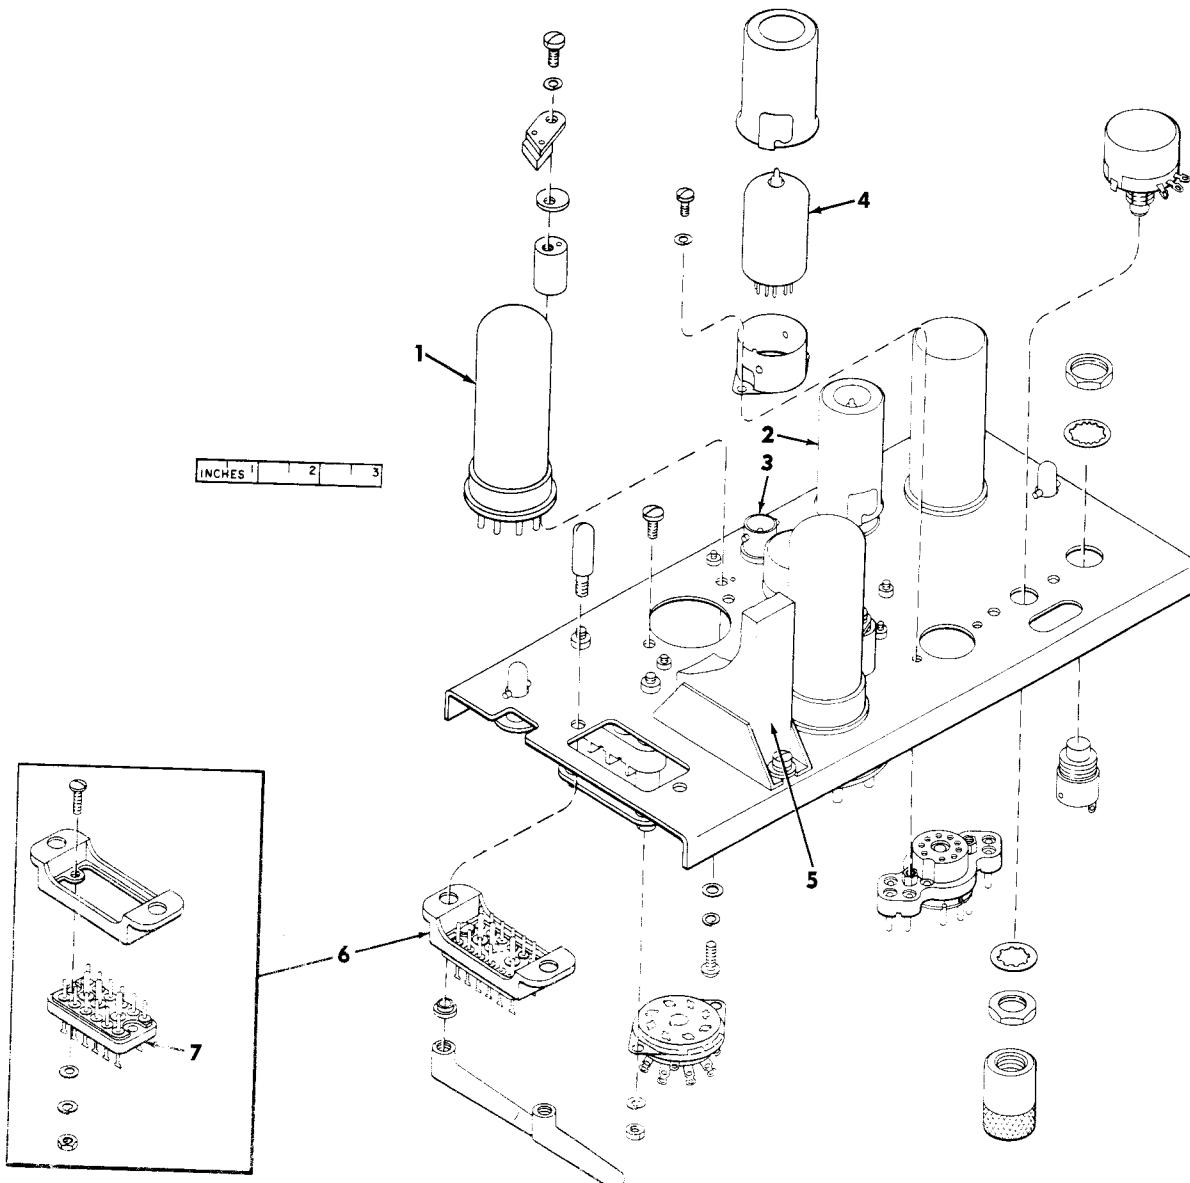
Amplifier, electronic control AM-1077/M (8171393)–partial exploded view
